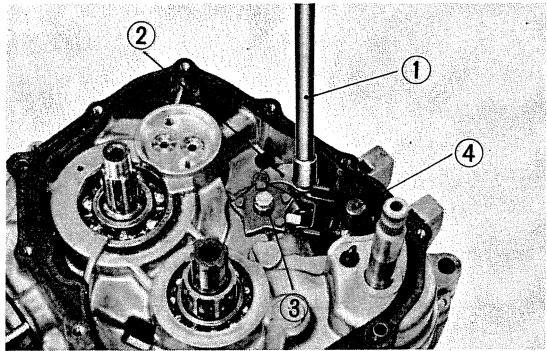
① 6 mm, T-handle box wrench ② Gear shift drum stopper ③ Gear shift cam ④ Gear shift spindle
